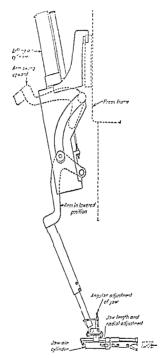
The Iron Hand swinging-arm press-unloading device. (Sahlin Engineering Co.)
